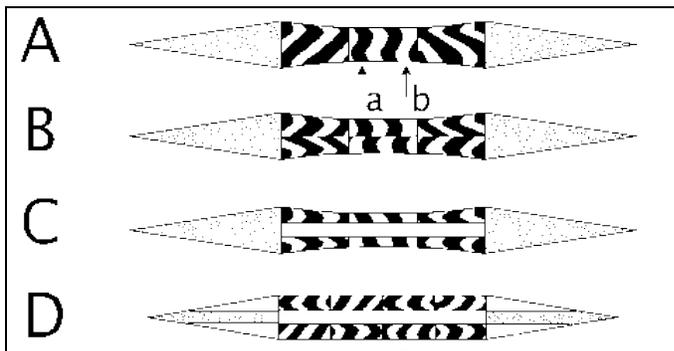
Different cross sections of Viking age swords, the striped parts are pattern welded.
